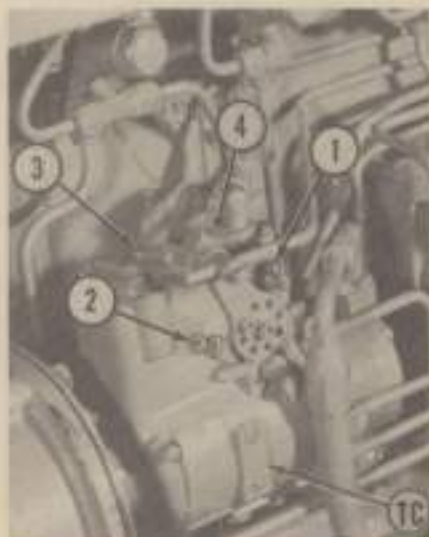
View of injection pump showing the governed speed adjusting screws and timing hole cover (TC). Screw (1) adjusts the high idle speed, screw (2) determines the low idle speed.
